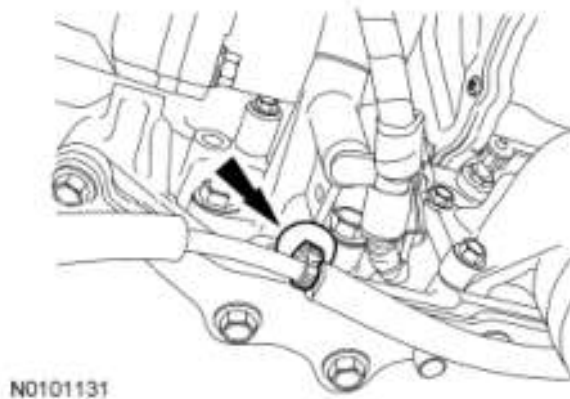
Locating Selector Lever Cable Fastener From A/C Compressor Mounting Bracket
